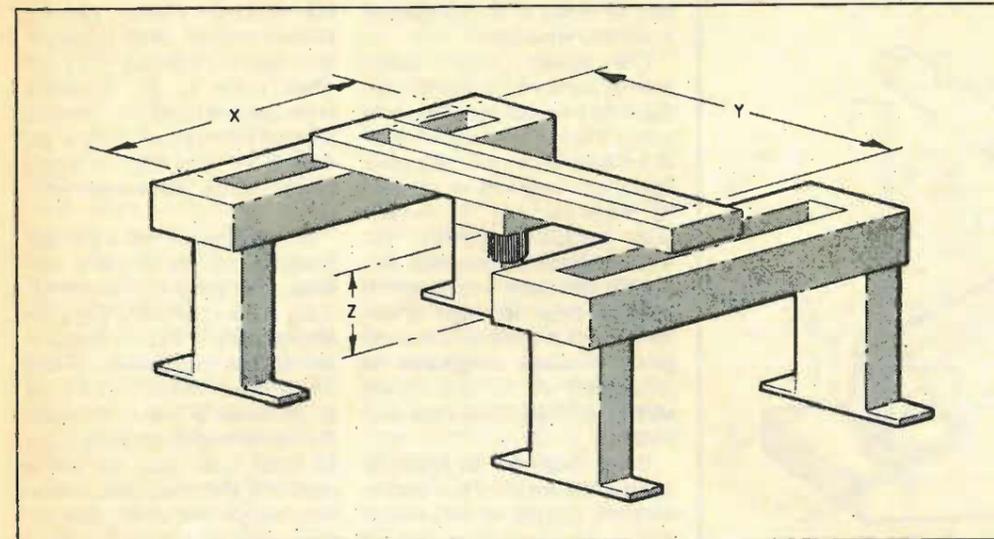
Further example of the solid rectangle configuration. Manipulator covers area xy with the manipulator height over work area variable between zero and z. Uses include machine tools, heavy plant assembly and transferring parts within workcells normally outside the reach of the more conventional robot.
